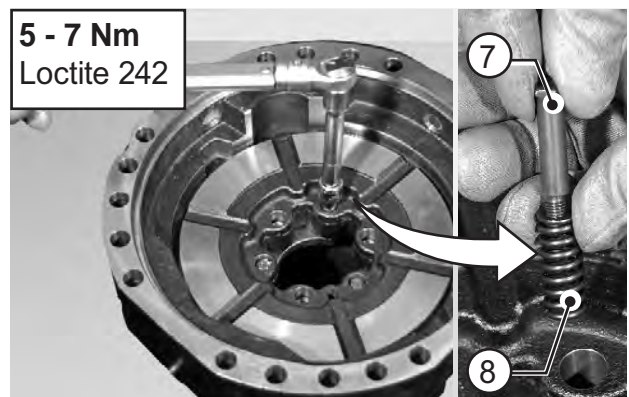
Fit the reversal springs (8) on the piston (9). Apply LOCTITE 242 to the thread of the screw. Tighten with torque wrench setting of 5 - 7 N·m
